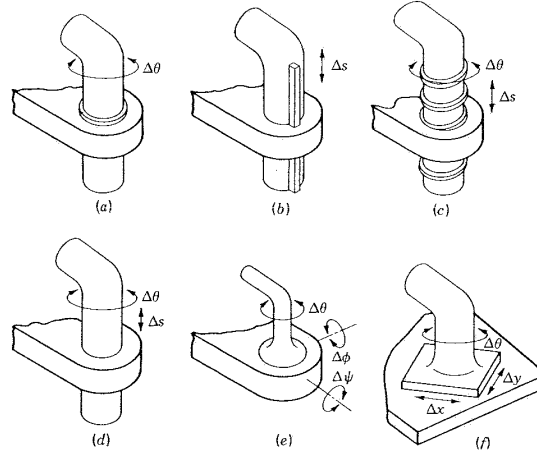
The six lower pairs: (a) revolute or pin; (b) prismatic; (c) helical; (d) cylindrical; (e) spherical; (f) planar.
